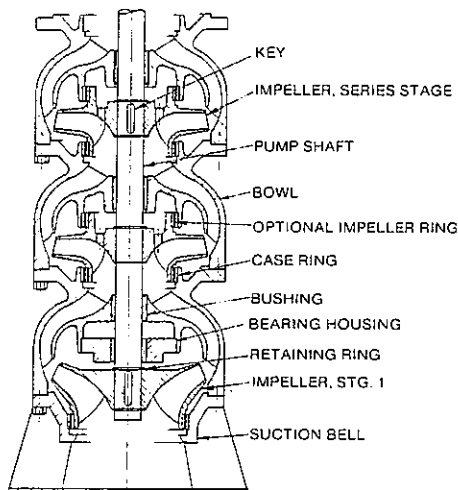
Size 6 1/2 A-8 1/2 A with optional impeller ring
